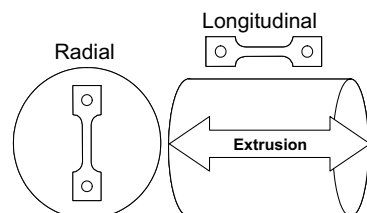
Cutting scheme of the specimens used in tensile tests.
